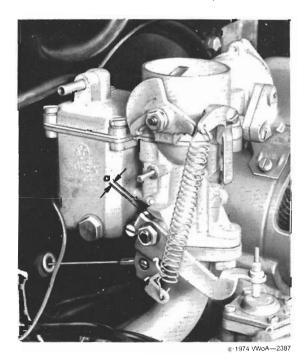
Full-throttle clearance between throttle valve lever and stop on carburetor body.
